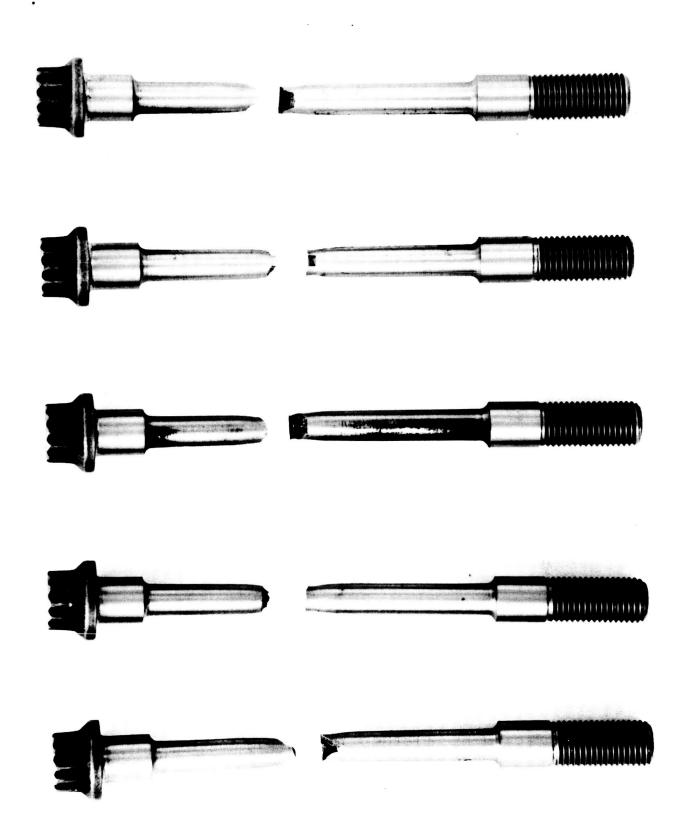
C A-286 REDUCED SHANK BOLT SPECIMENS TESTED AT -200°F (-129°C)
